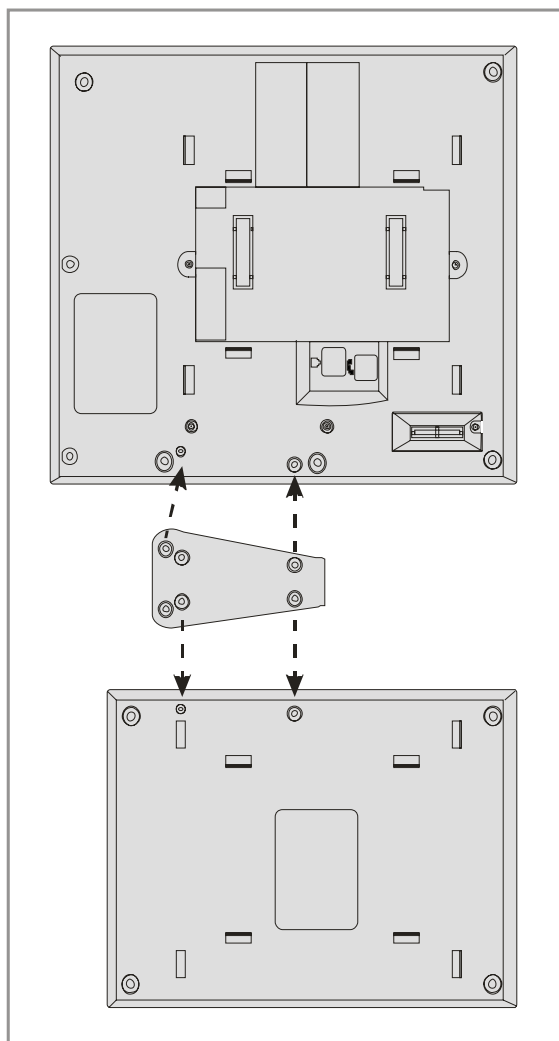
Attaching iDCS 64 Button Module to an iDCS Keypad
